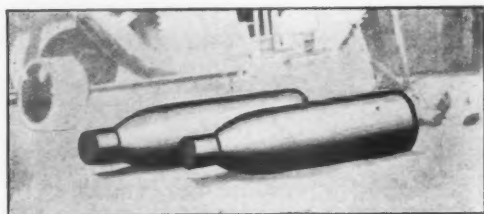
FINISHED SEMI-STEEL SHELL CASTINGS
